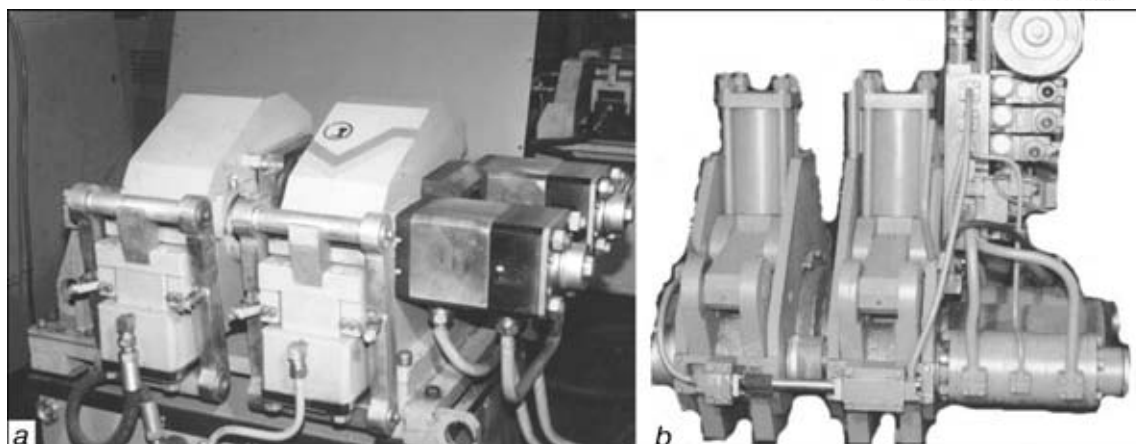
Welding machines of MD-103 (a) and K-872 (b) types
